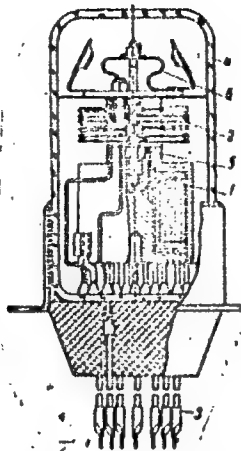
1- electromagnet coil; 2- contact system; 3- bantam mount; 4- tube; 5- armature; 6- omega-shaped laminated spring
